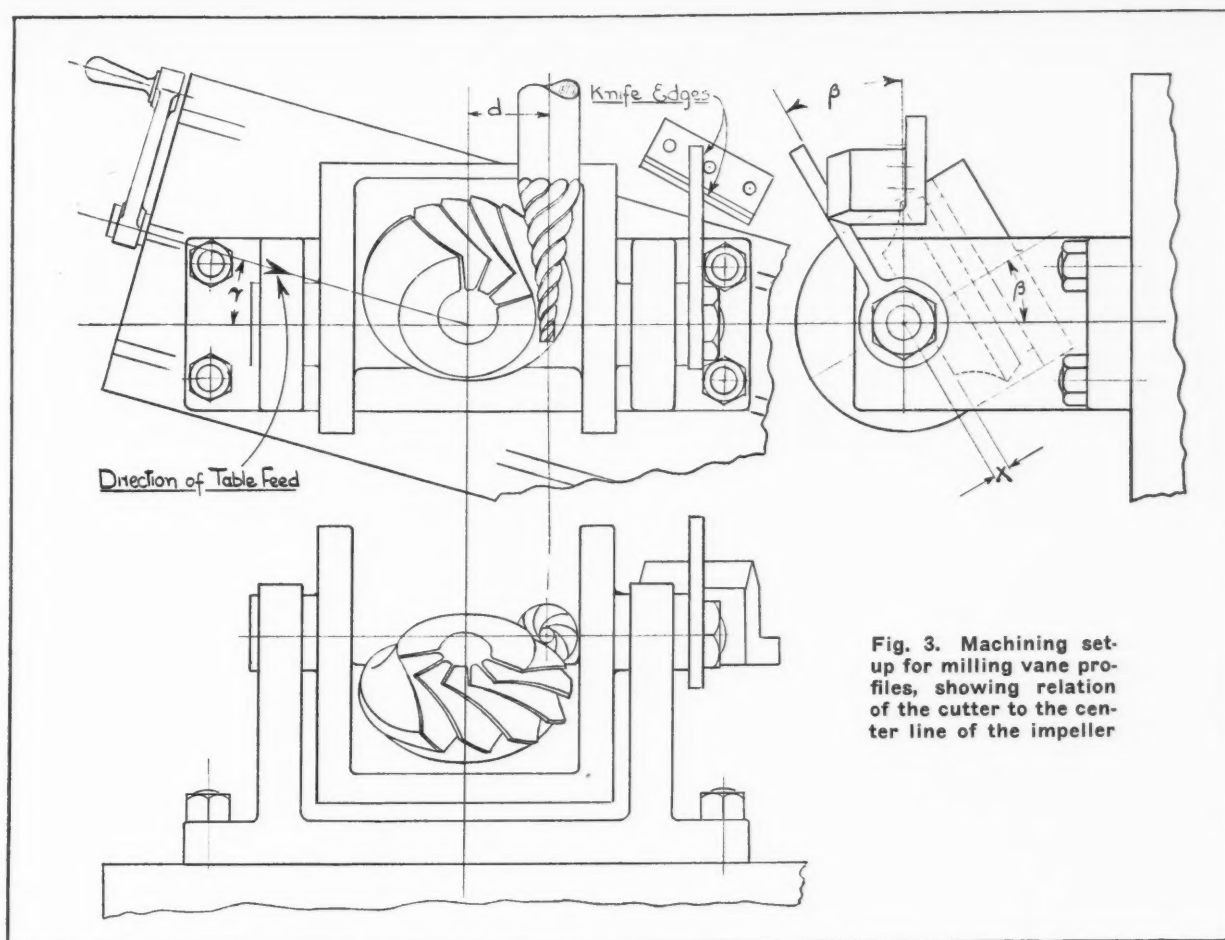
Machining set-up for milling vane profiles, showing relation of the cutter to the center line of the impeller
